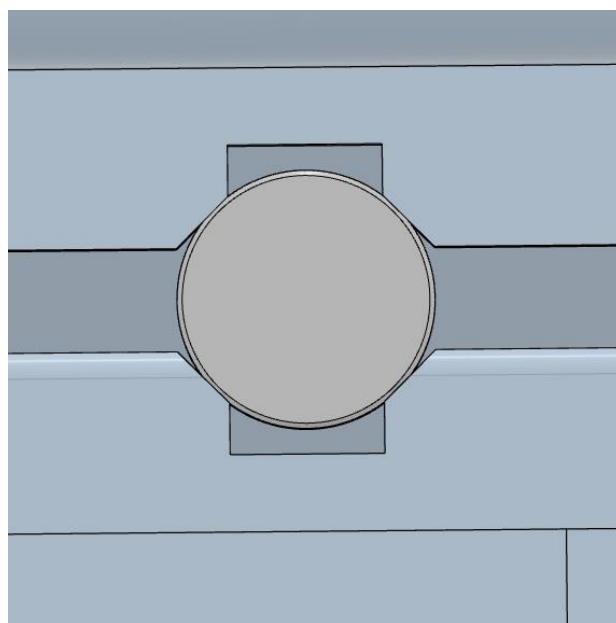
Concept 4 with a cylindrical “key” and chamfered edges that the key rest against
